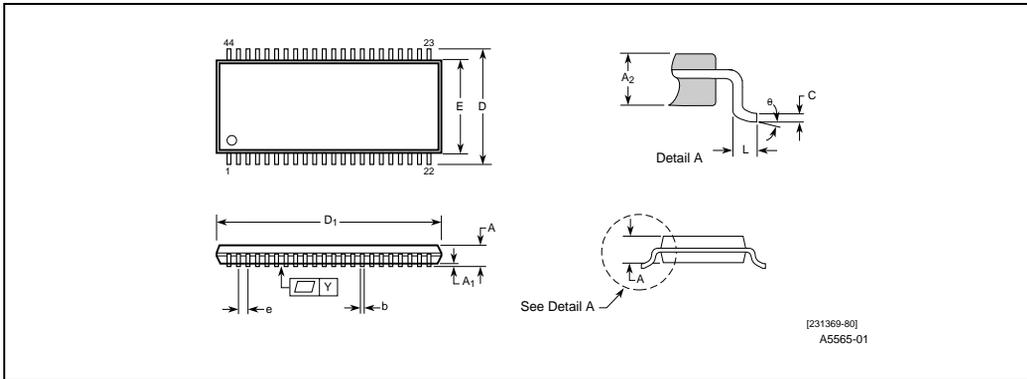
44-Lead PSOP Package Drawing and Specifications
